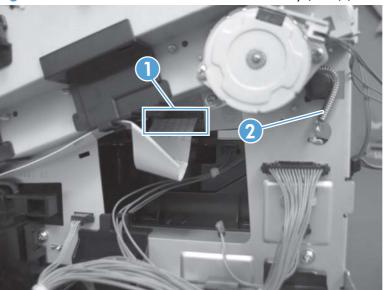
Remove the laser/scanner assembly (Y/M) (5 of 12)
